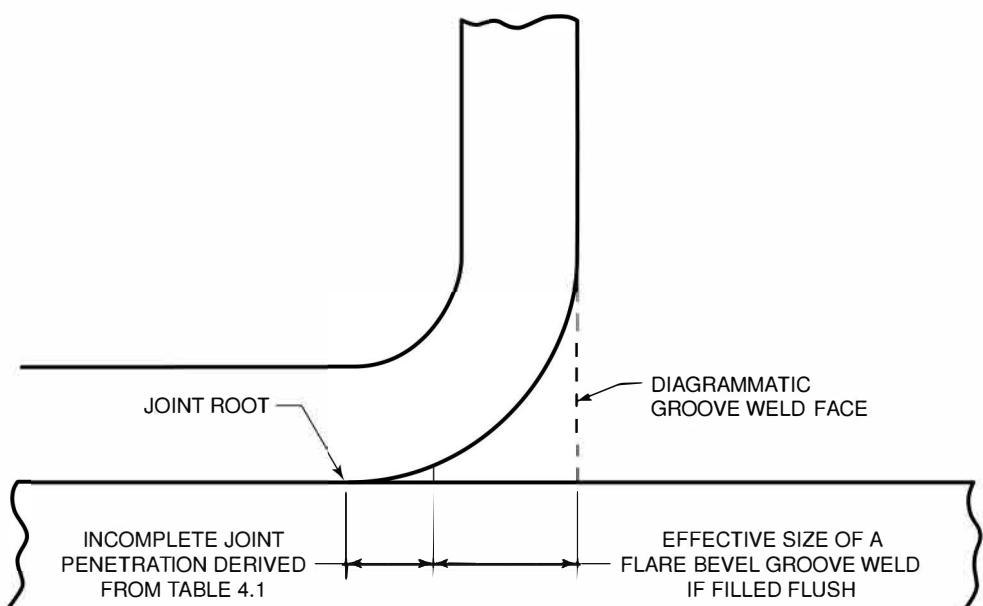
Unreinforced Flare Bevel Groove Weld (see 4.4.2.7)
